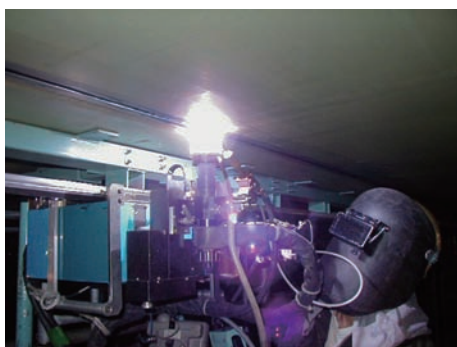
Overhead butt joint welding (4G) along the bottom plate of an LNG tank is conducted with automatic TIG welding equipment using PREMIARC™ TG-S709S TIG wire.
